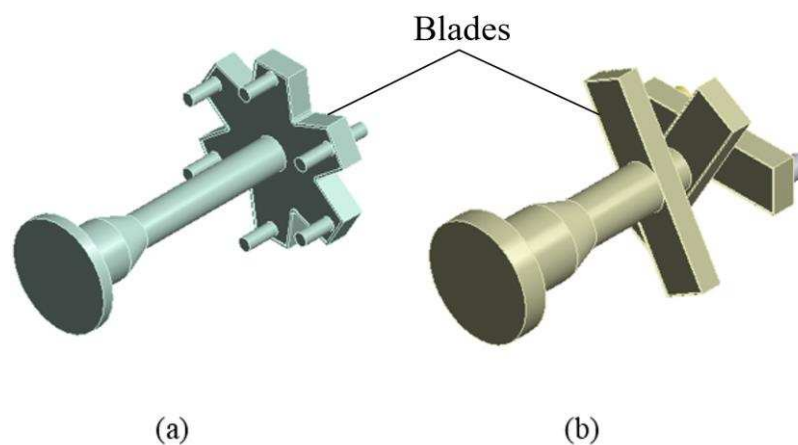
CAD drawing of the impeller types (a) impeller type I, bin impeller, and (b) impeller type II, star impeller (Reproduced with Permission from Maschinenfabrik Gustav Eirich GmbH & Co KG., January 2017).
